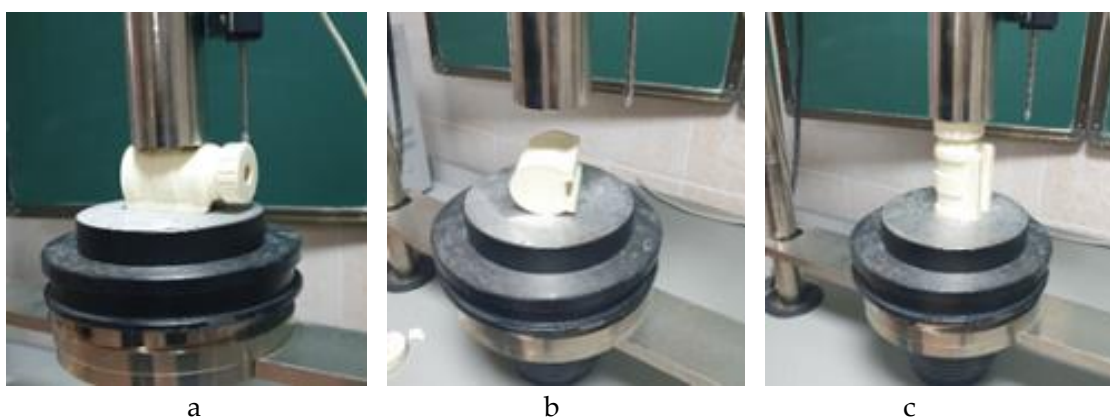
Cylindrical housing compression test: a) side A; b) side B; c) side C
